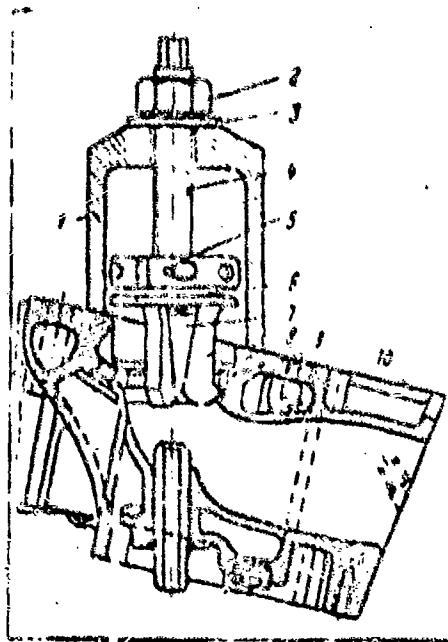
Pressing an inserted valve seat out of the cylinder head:
